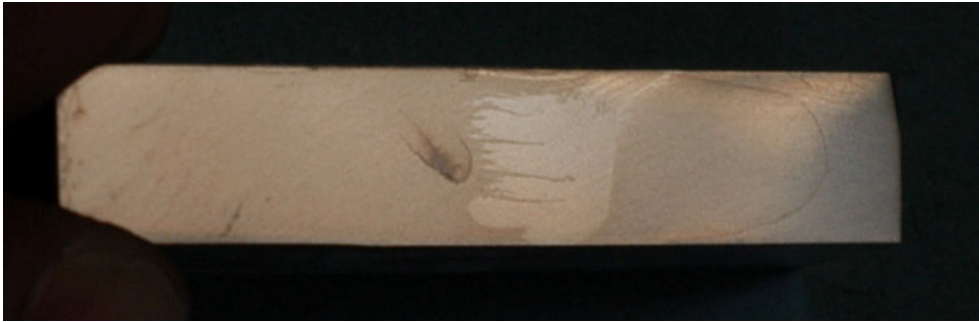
Photograph of typical dissimilar 7020/7056 weld
